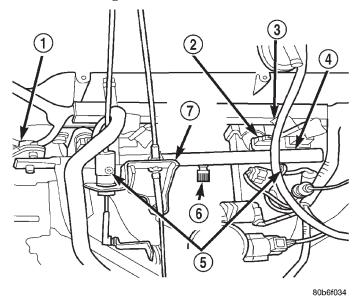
Fuel Injector Rail/Fuel Damper—2.5L Engine
